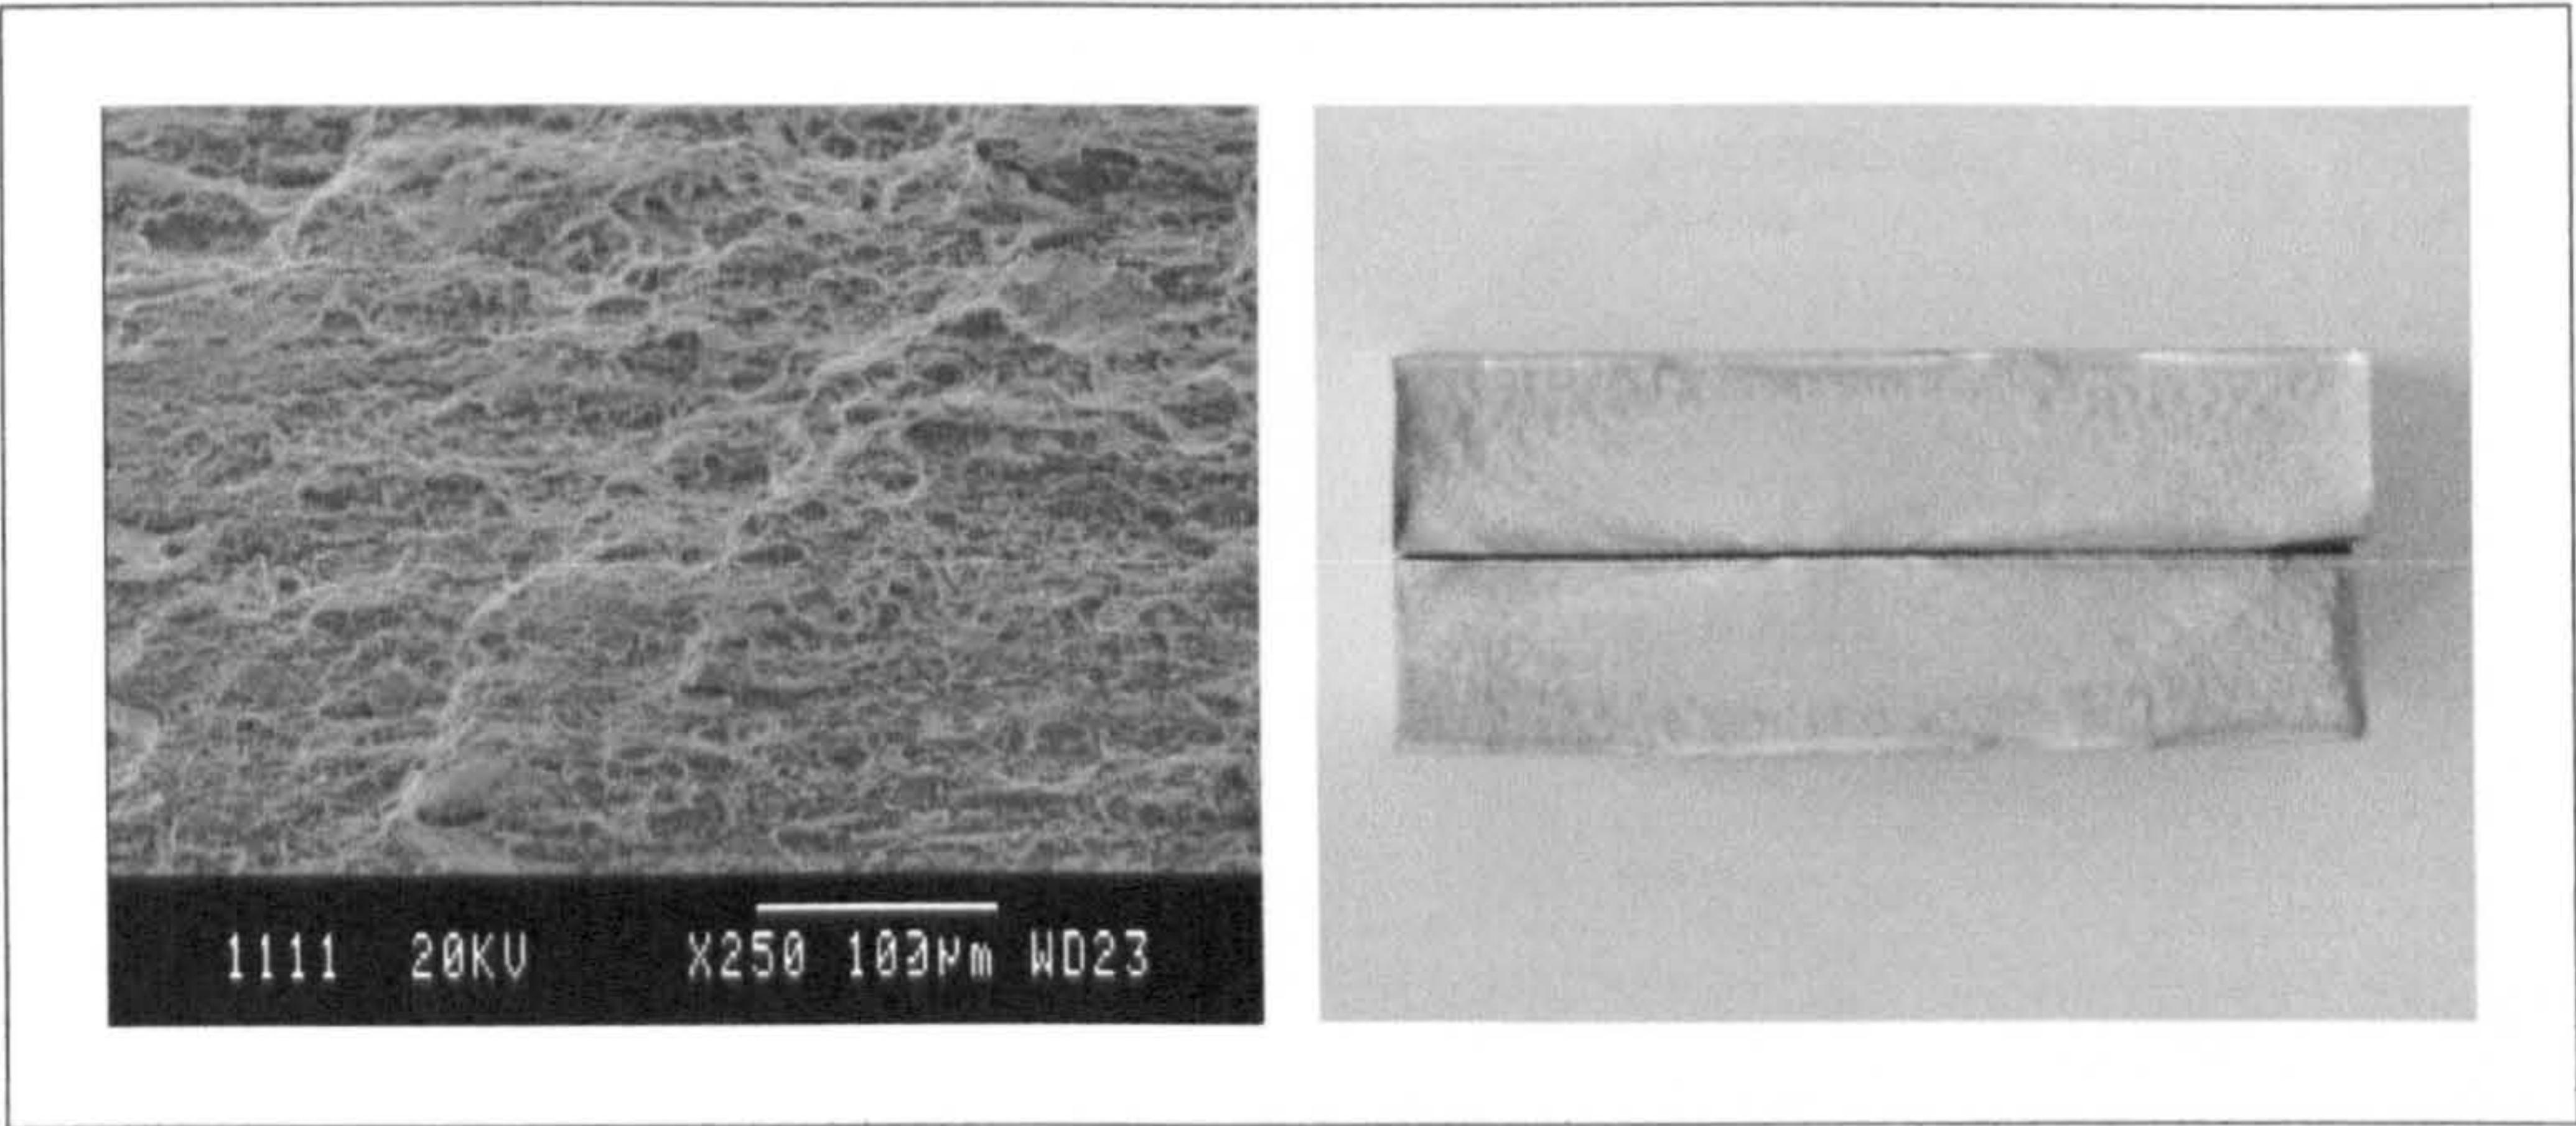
Typical fast fracture surface exhibiting microvoid coalescence (left), complete fracture surface (right).
